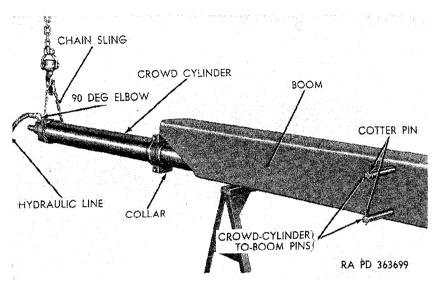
Removing boom crowd cylinder from boom M62 and M246.
